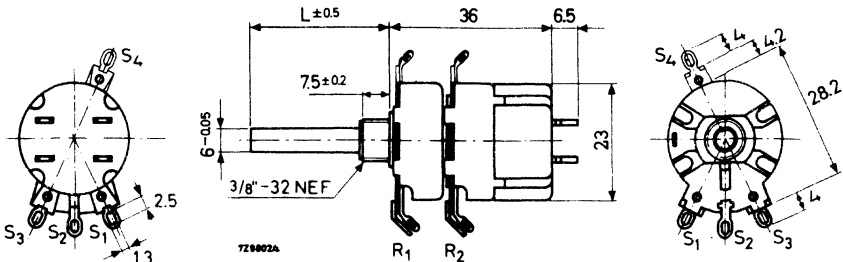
Potentiometers with d.p.s.t. rotary switch, plain spindle, soldering tags (2322 366)
